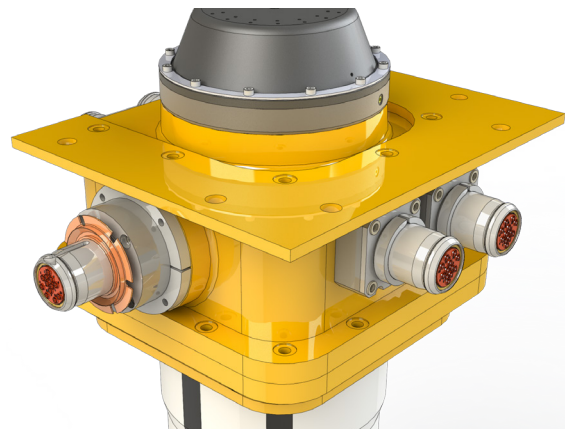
Render of a horizontal fastening idea (Private picture, 2023)
